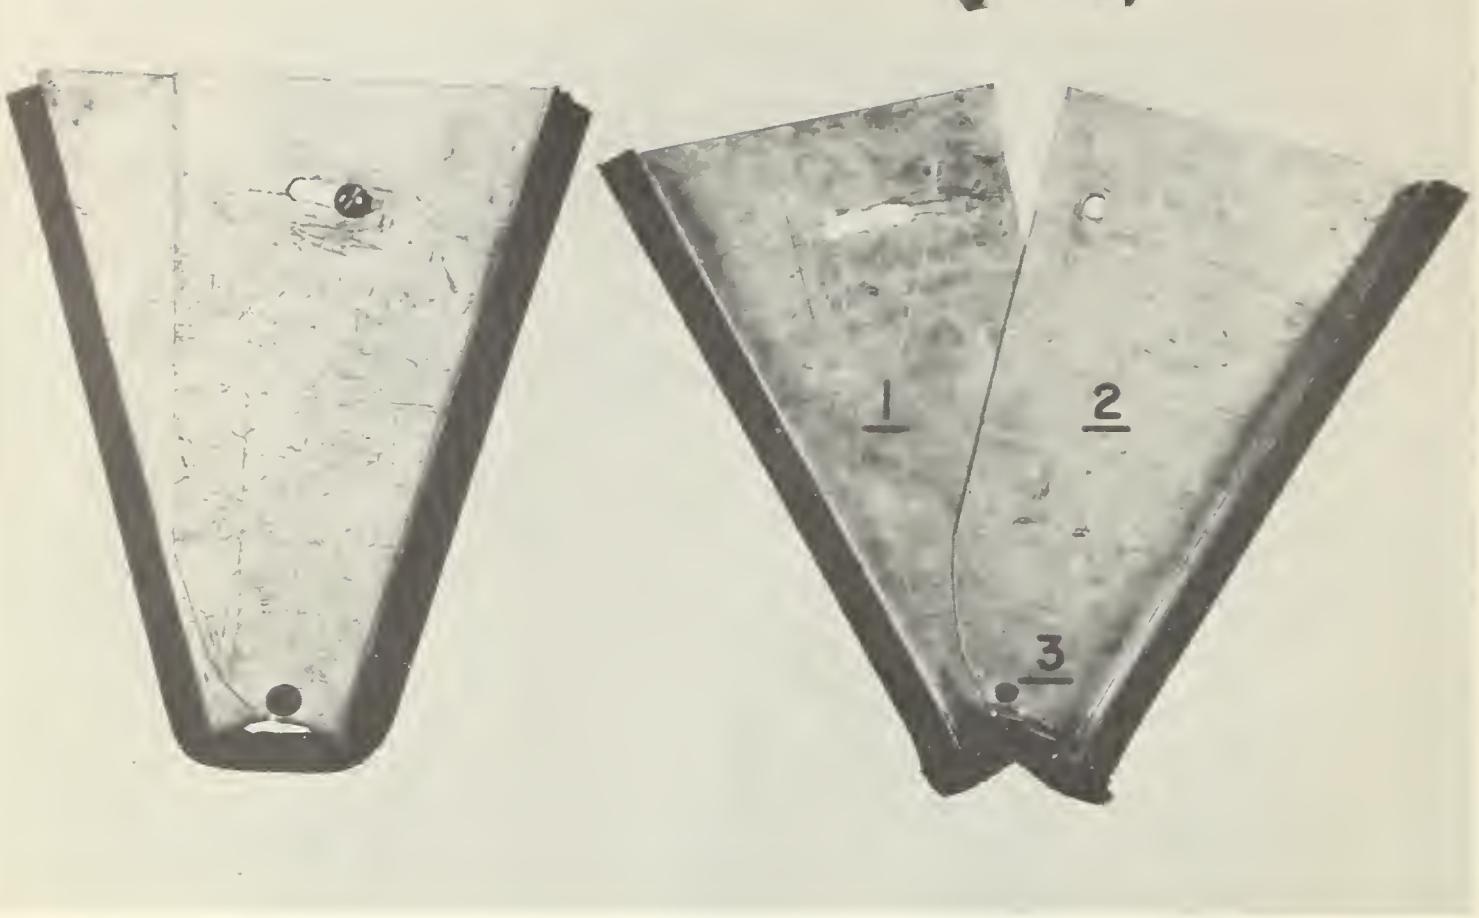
Removable separators used for band placement showing individual parts and point of assembly.
